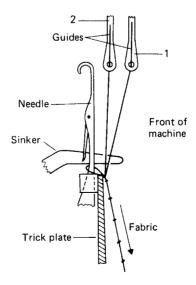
Knitting elements in a latch needle raschel machine.
